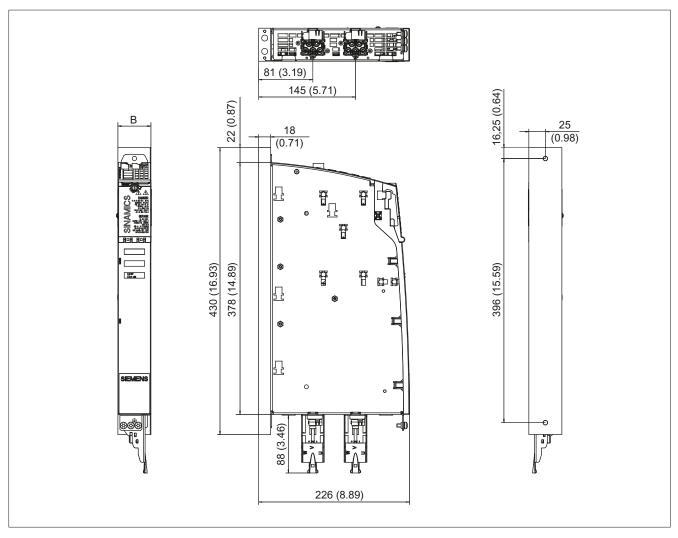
Dimension drawing of 3 A to 18 A and 2 x 3 A to 2 x 9 A Motor Modules Booksize with cold plate, all dimensions in mm and (inches); example: 2 x 5 A Double Motor Module
